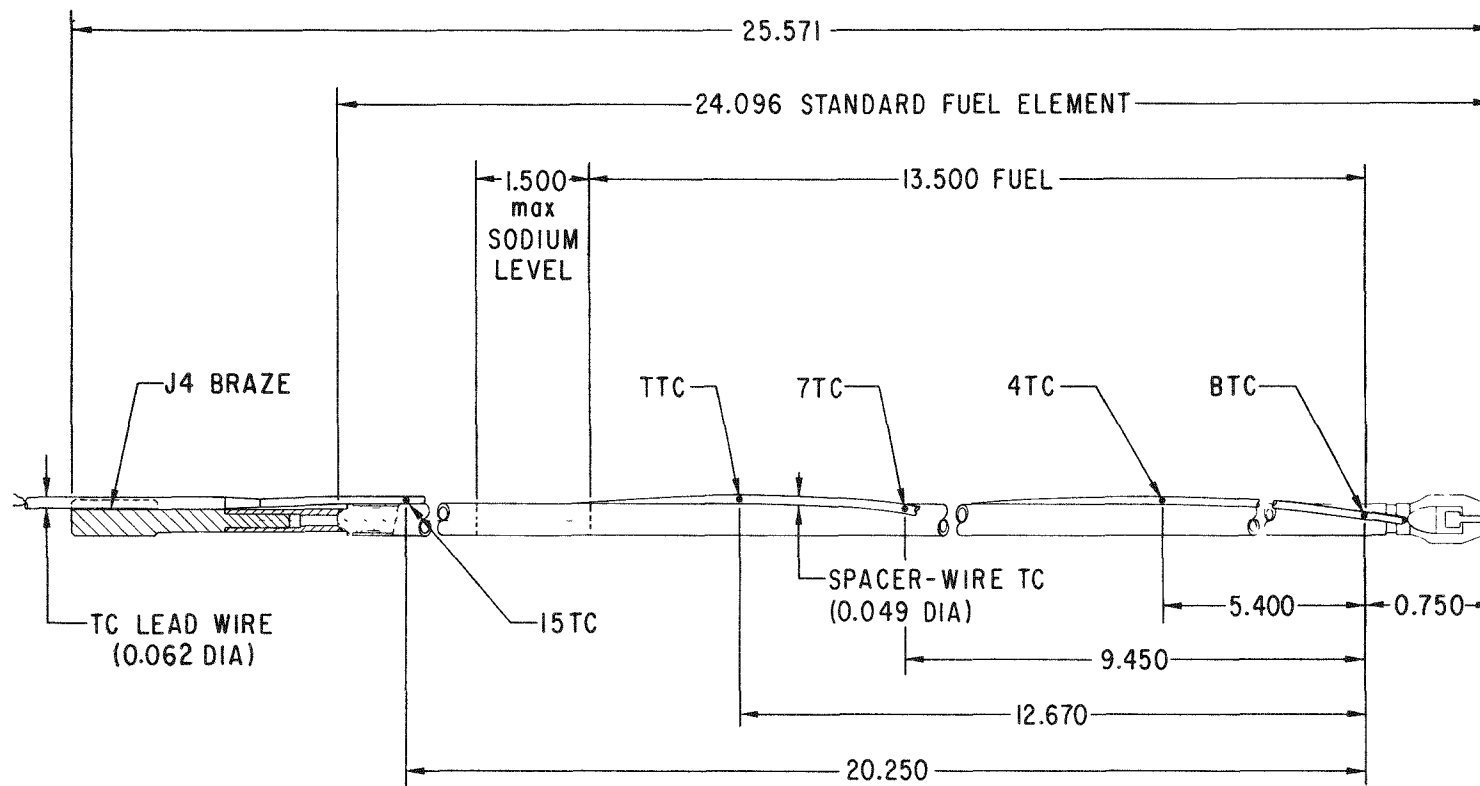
Detail of XX08 Fuel Element, Showing Location of Spacer-wire Coolant Thermocouples. All dimensions in inches; 1 in. = 25.4 mm. Codes identifying thermocouples--e.g., BTC and 4TC--are explained in Fig. 10 and Table II.
